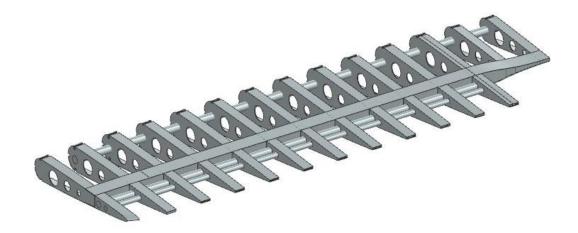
ISOMETRIC VIEW OF ELEVATOR SUBSTRUCTURE
